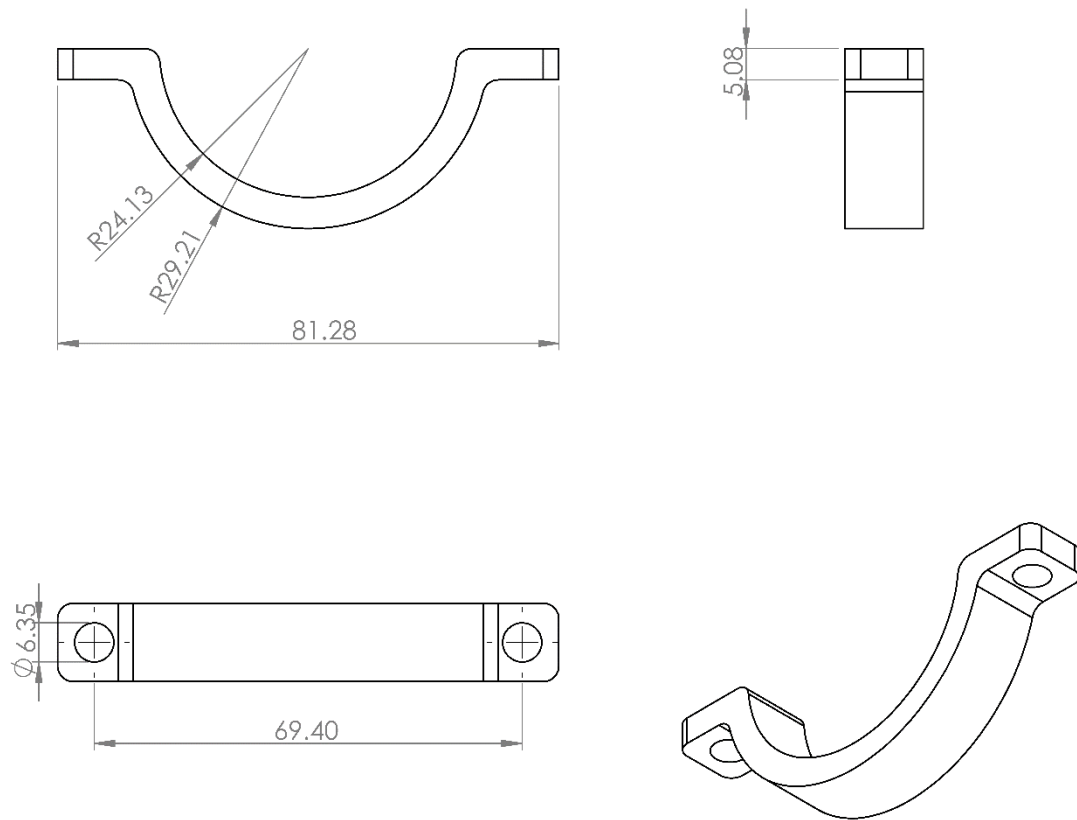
3D-printed tube collar (top) for the impedance tube (unit: mm)
